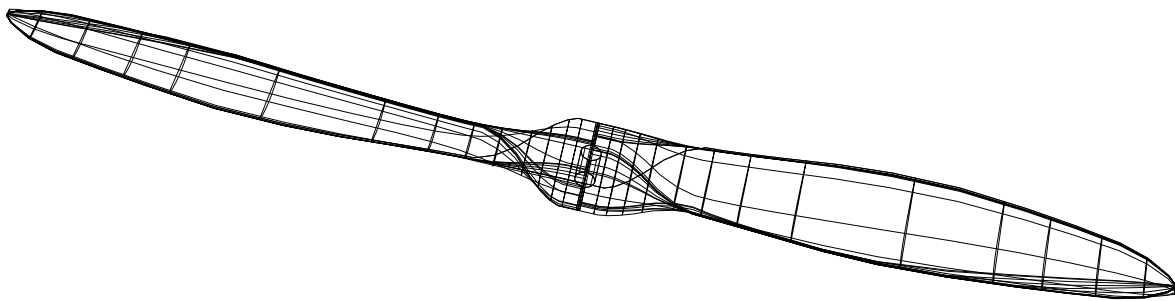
A propeller of a model airplane has blades with only convex and saddle-like regions which can be machined using the piecewise ruled surface side milling technique.
